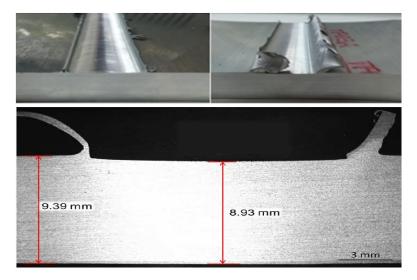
Toe flash in an FSW butt joint weld [15].
